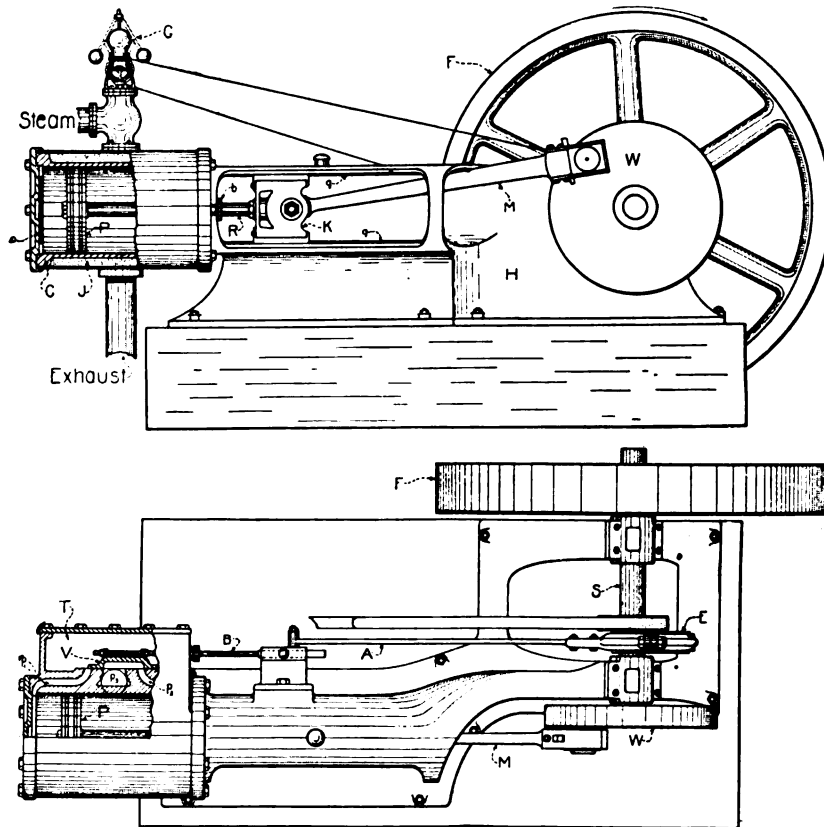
Elevation and plan of a simple, horizontal, slide valve engine with throttling governor.
